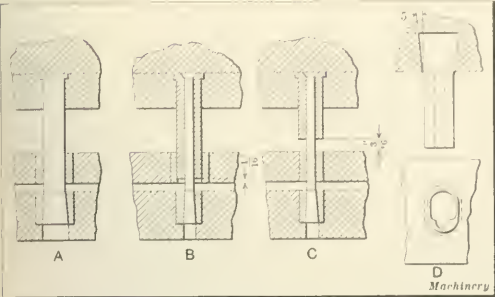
Standard Methods of supporting Perforating Punches in Punch plates
